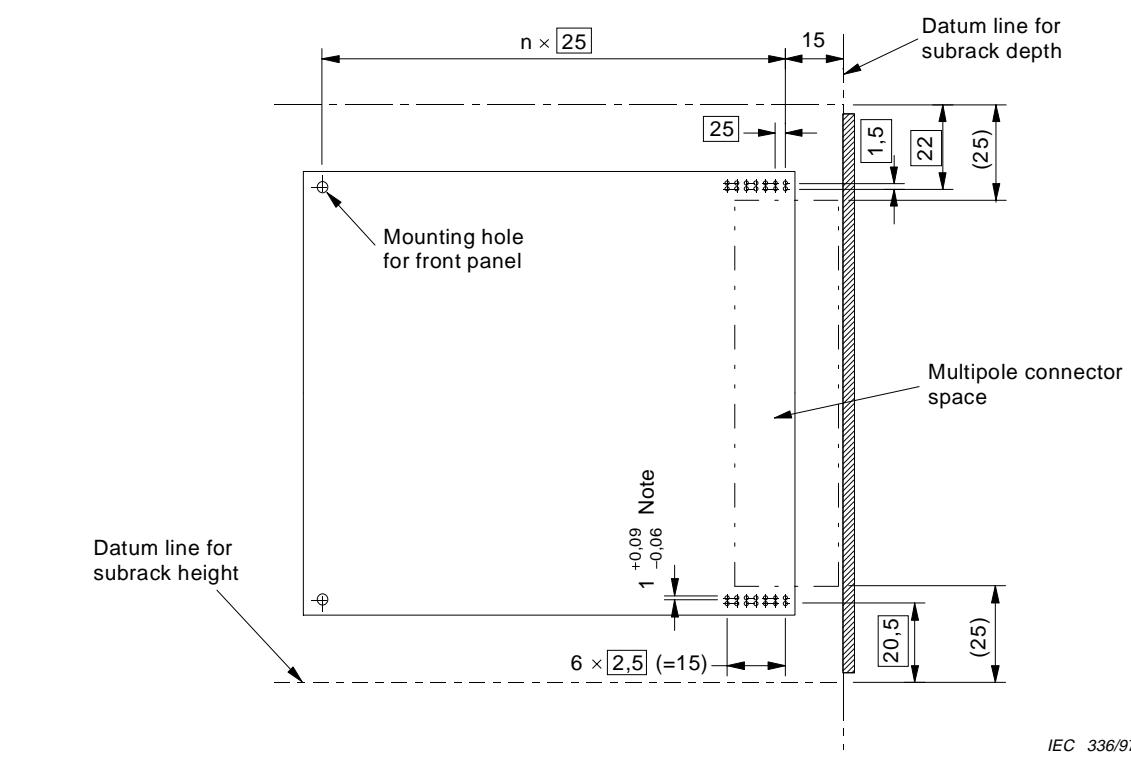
Example of hole pattern on printed board in the 25 mm equipment practice (for information only)
